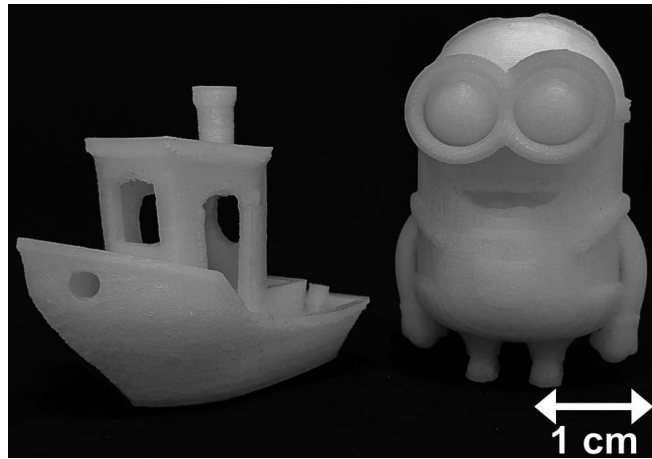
More complex print objects demonstrating dimensional accuracy by FFF printing of HDPE with optimized conditions on a SEBS plate and adjusted amount of extruded polymer melt.
